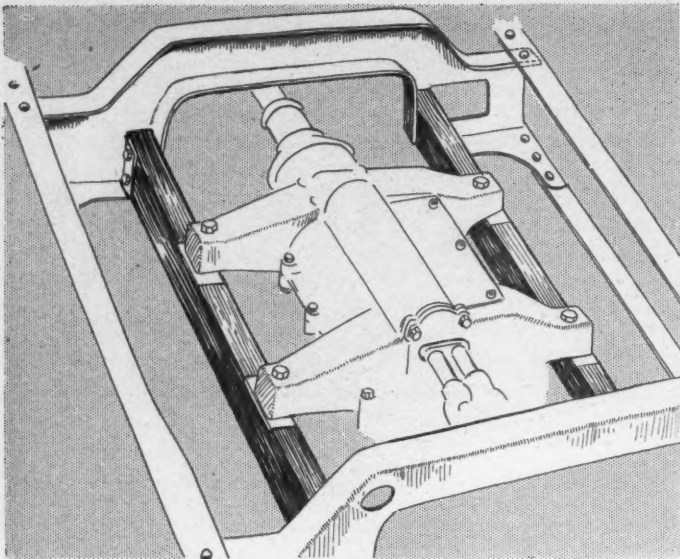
OWEN GEARSET CARRIED ON WOOD FRAME
